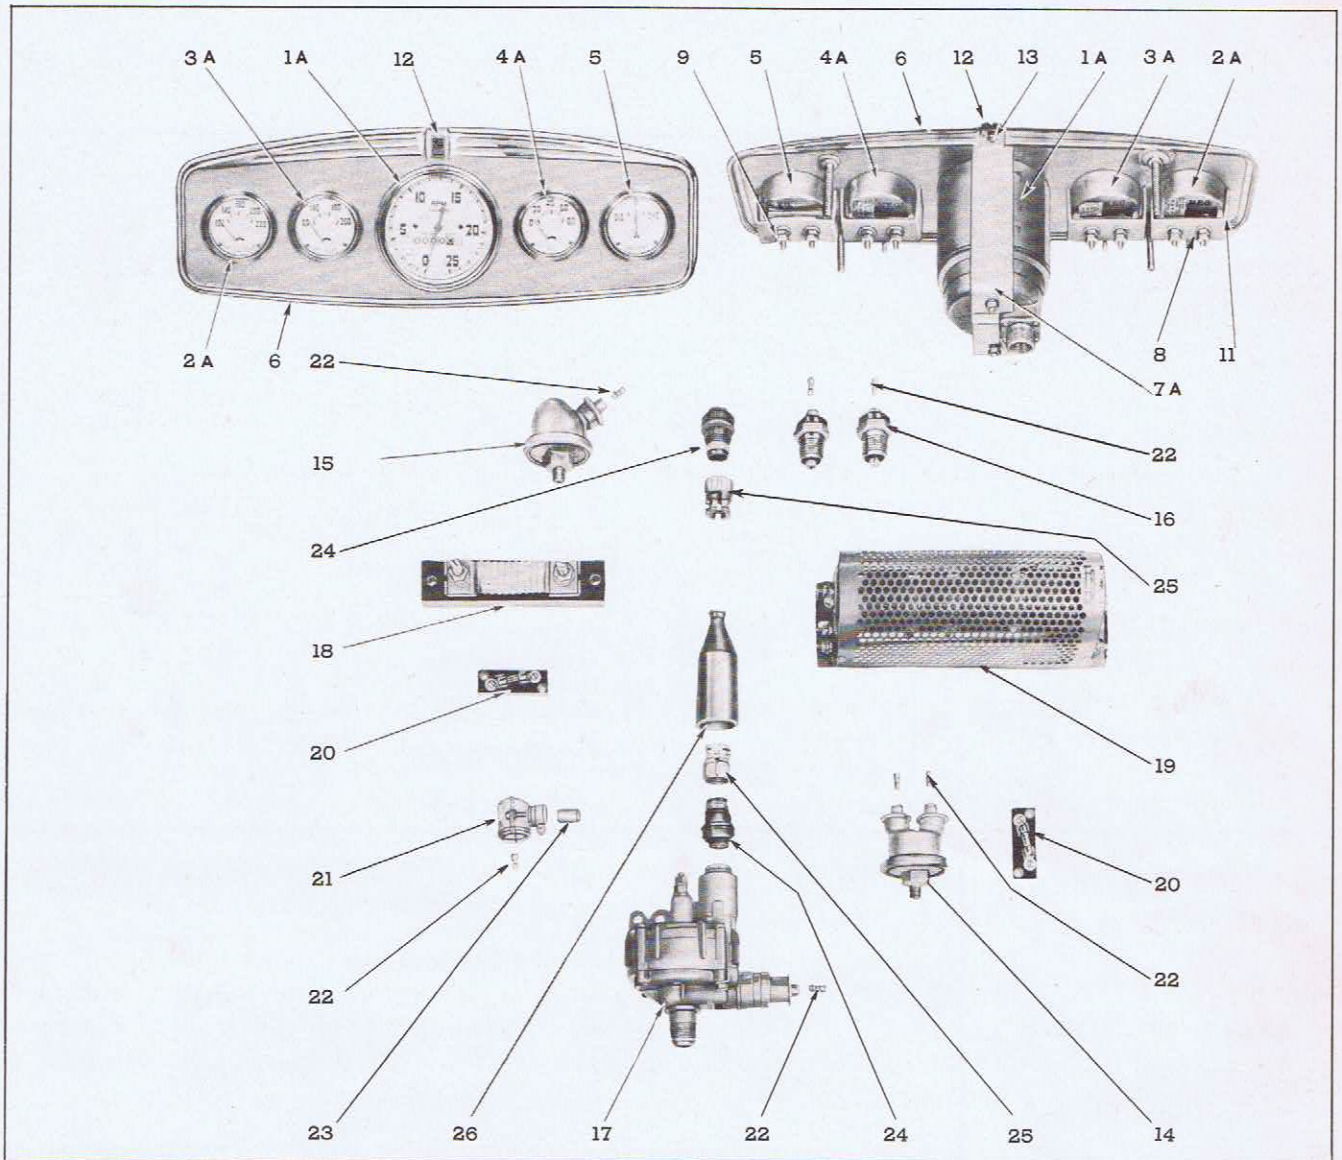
ELECTRICAL INSTRUMENT PANEL ASSEMBLY FOR TWIN ENGINE UNIT.
